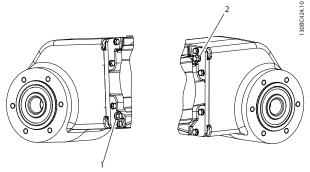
OneGearDrive Oil Screws 1 and 2
